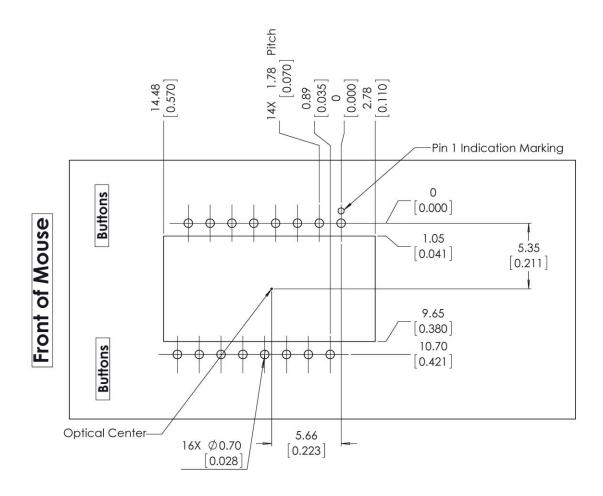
Recommended sensor orientation, mechanical cutouts and spacing (Top View)
